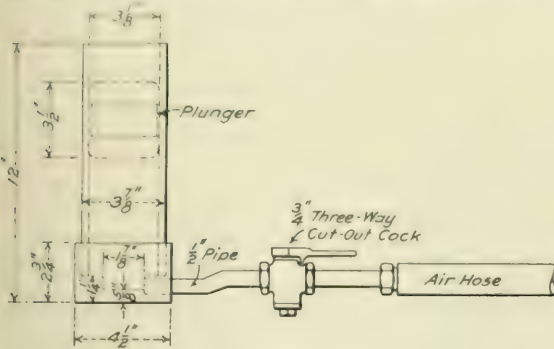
Pneumatic Hammer for Driving Out Bolts.
